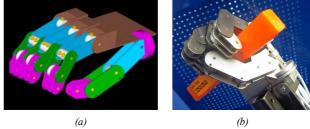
(a) AutoCAD® drawing of the robot hand; (b) the constructed robot hand.
